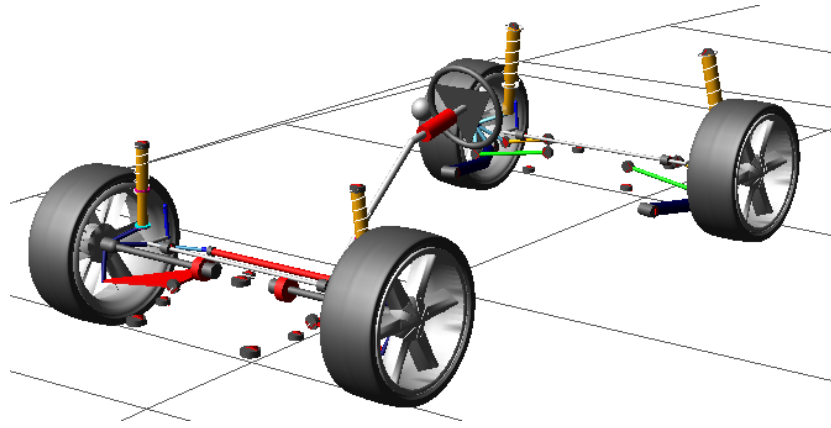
Full vehicle assembly in ADAMS/Car
